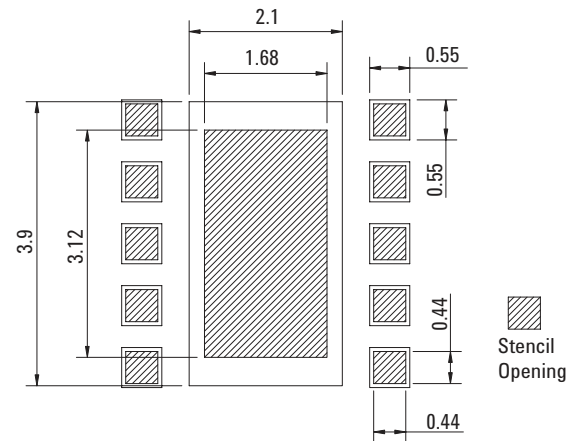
Combined PCB and stencil layouts (dimensions in mm)
